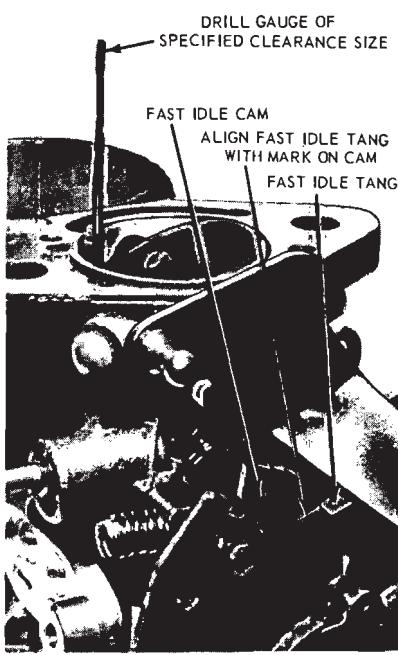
Throttle Plate Clearance—Carter Model RBS 1-V
